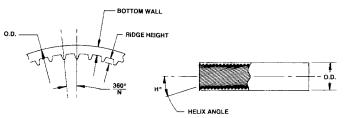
Inside Diameter Enhanced Tube Nomenclature
